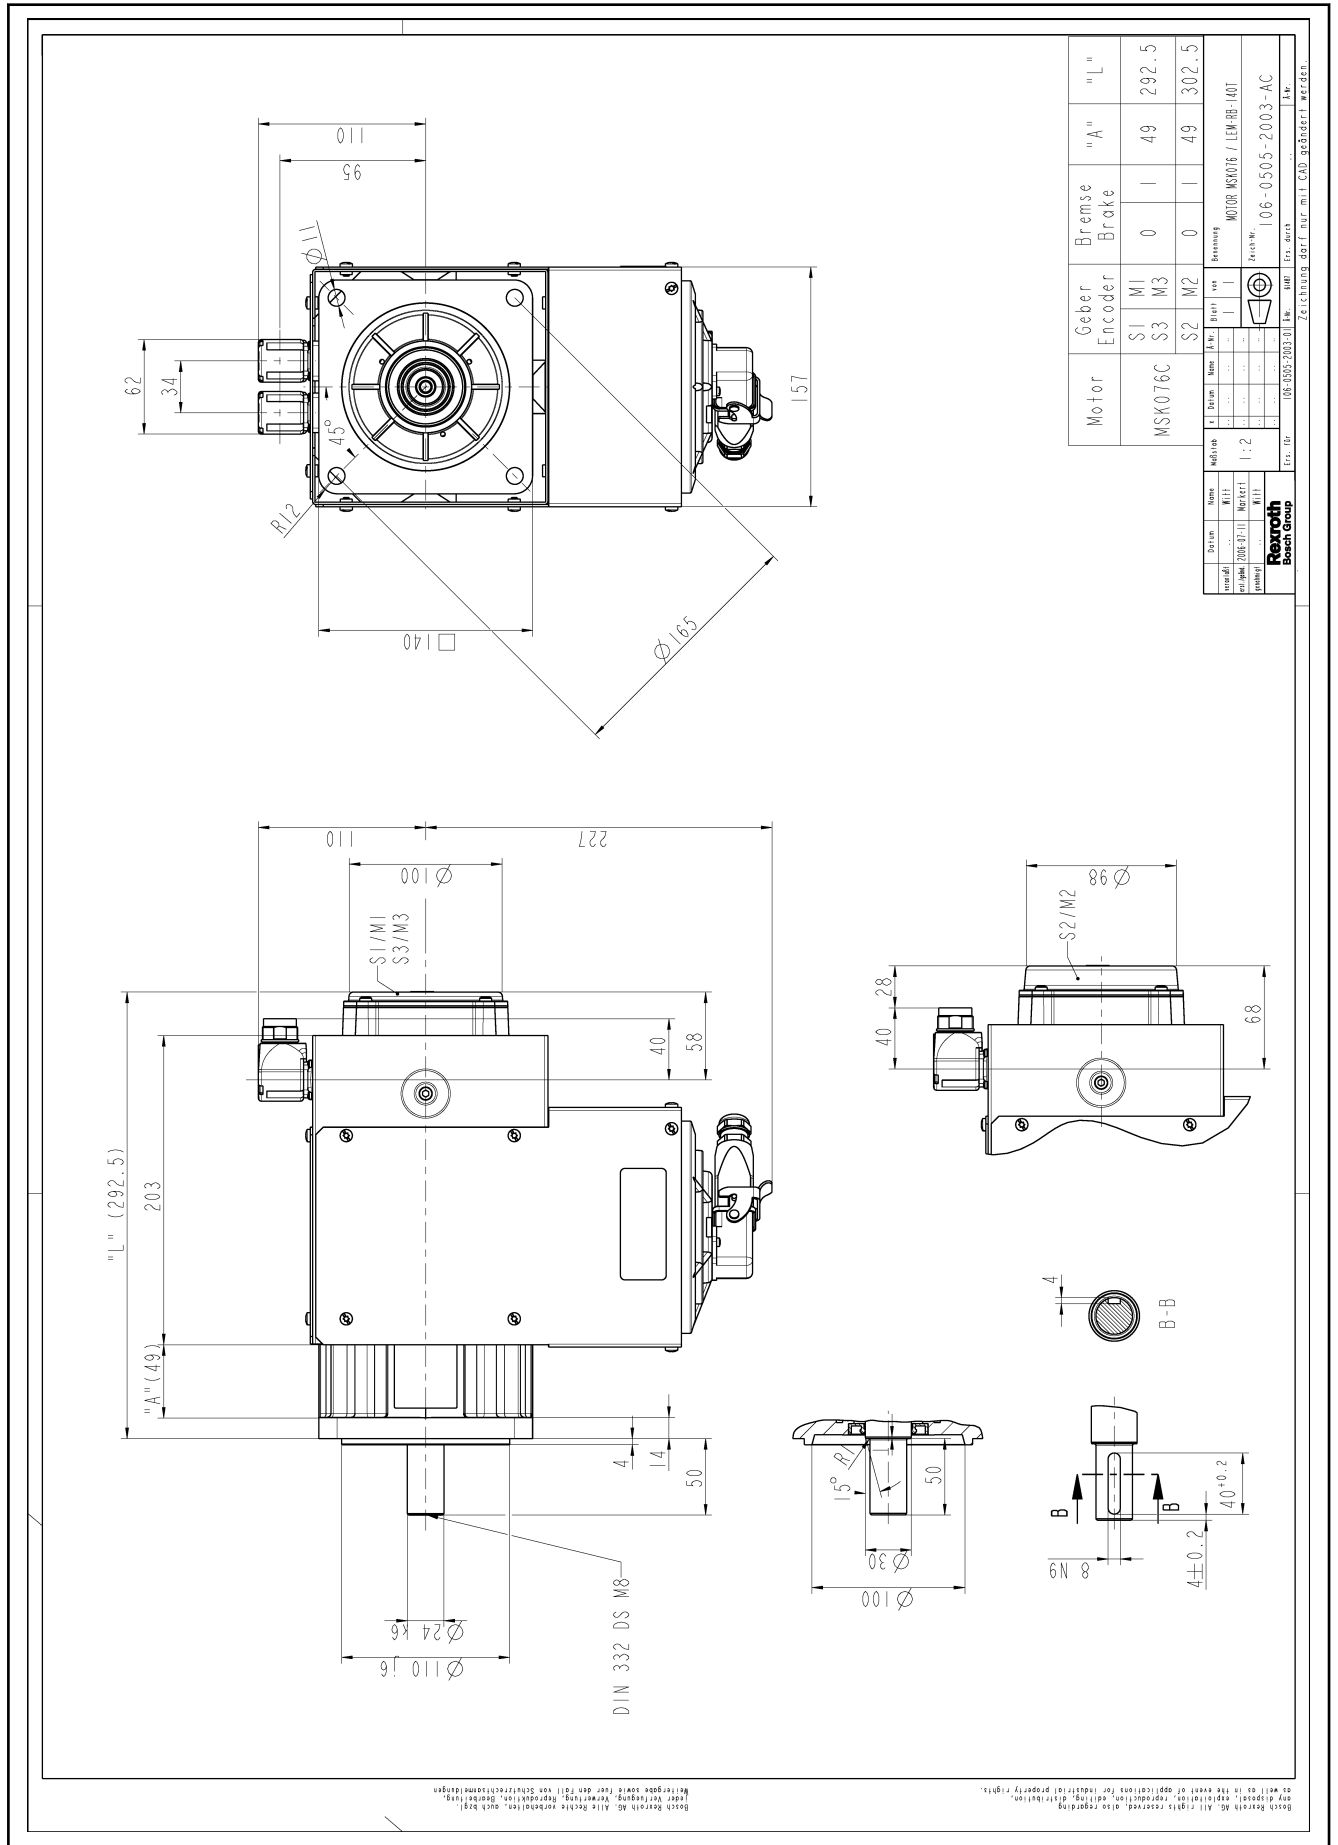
Dimension sheet MSK076 with radial fan unit
